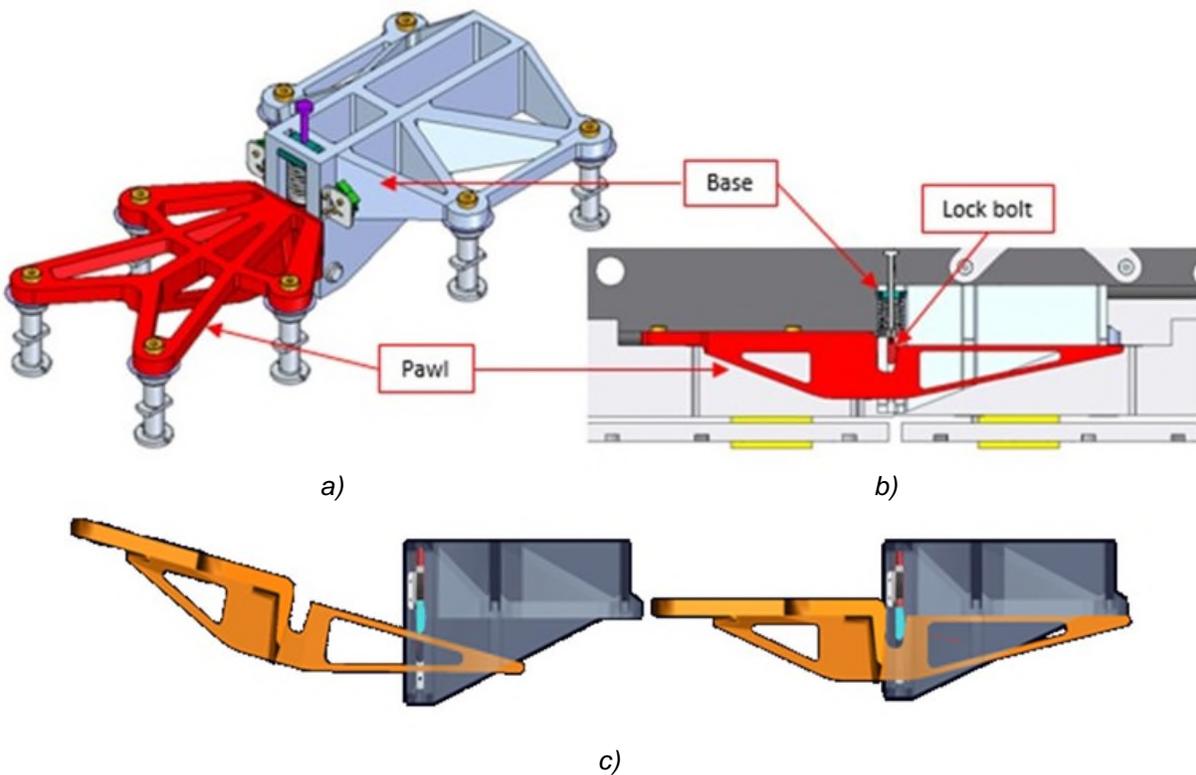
Latch mechanism a) Isometric view b) Cross section c) Latching kinematics
